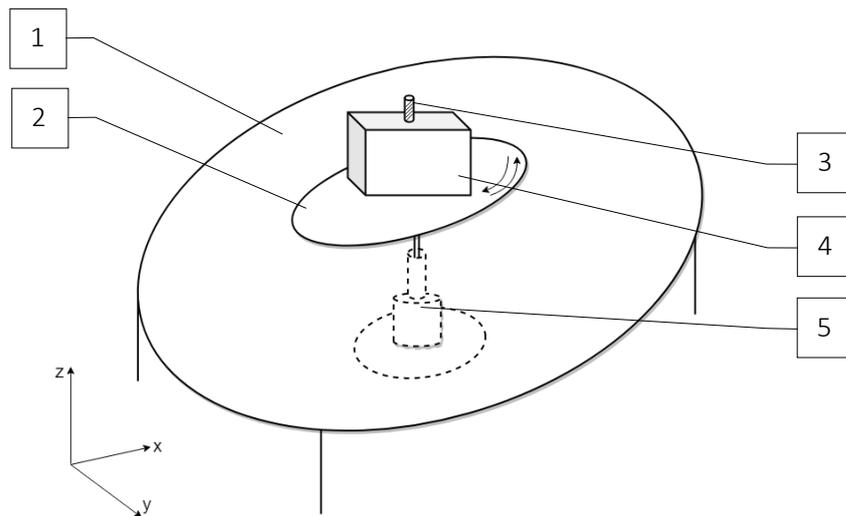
Scheme of delivery system with rotating platform. 1 – Big static landing platform; 2 – smaller rotating platform for cargo box; 3 – screw for attaching the cargo box to the drone; 4 – cargo box; 5 – base of smaller platform with motor, shaft etc. which will be under the landing platform.
